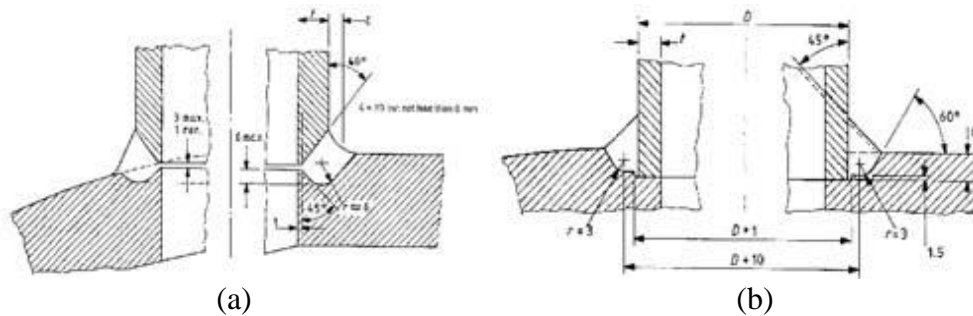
Full (a) and partial (b) penetration welds (Courtesy of Power Technology).
